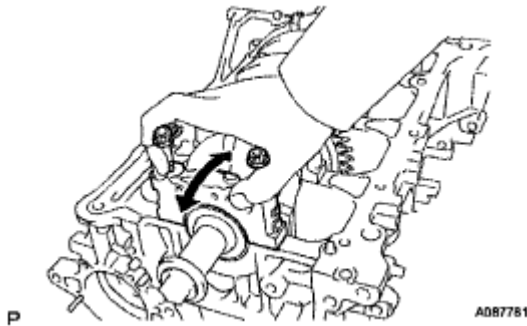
Identifying Bearing Cap Bolts To Remove Main Bearing Caps And Lower Bearings.
